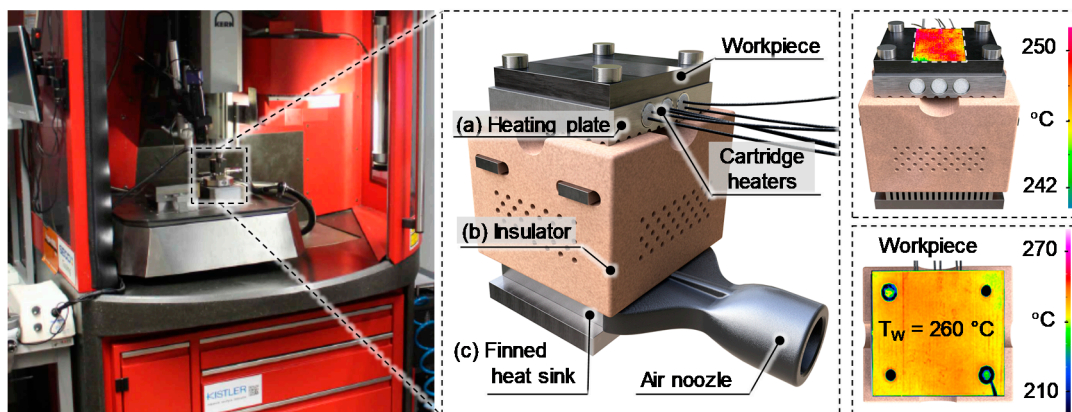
Machine tool KERN HSPC 2522 and the device for heating the workpiece to realise a thermally assisted micromilling process.
